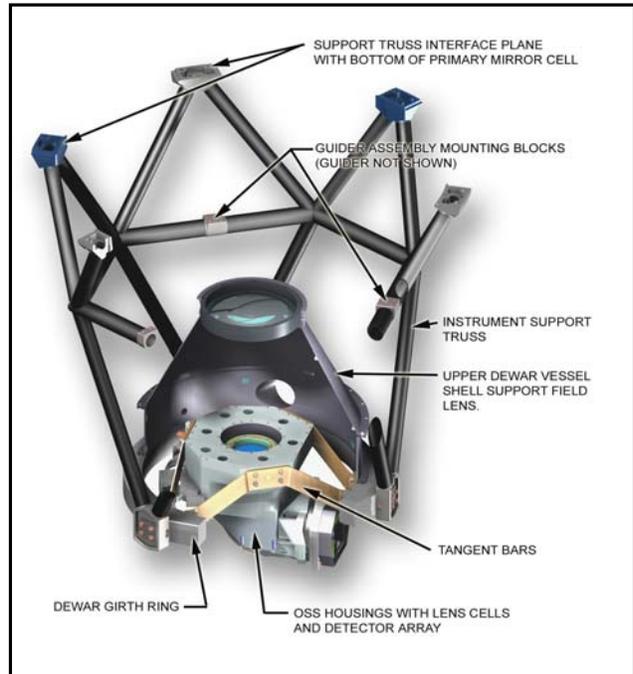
NEWFIRM instrument cutaway view showing the OSS support scheme and load path; OSS to tangent bars to girth ring to truss to telescope mirror cell.
